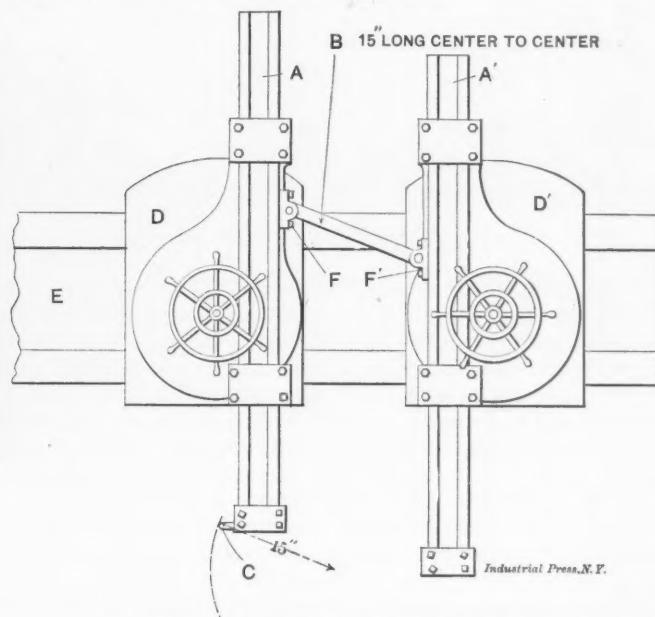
Boring Mill Attachment for Boring Spherical Seats.
